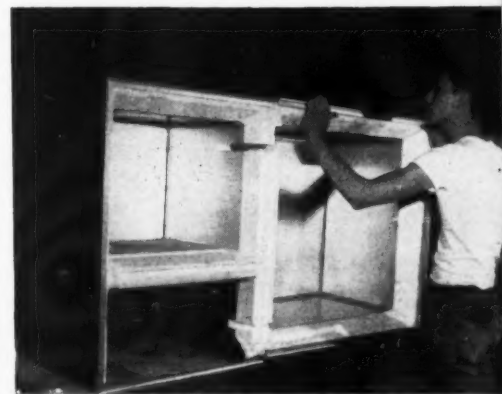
(Above) Final assembly begins by attaching extruded aluminum frame pieces to face of cabinet. Fig. 8 — (Below) Refrigerator as it appears assembled, including doors.
